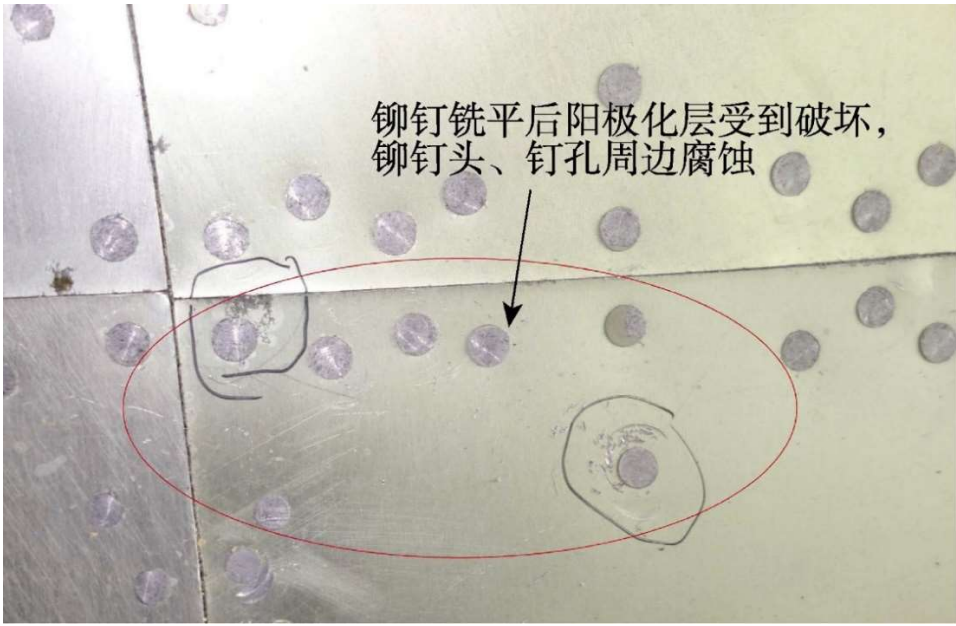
Corrosion of rivet head and adjacent area [14]
